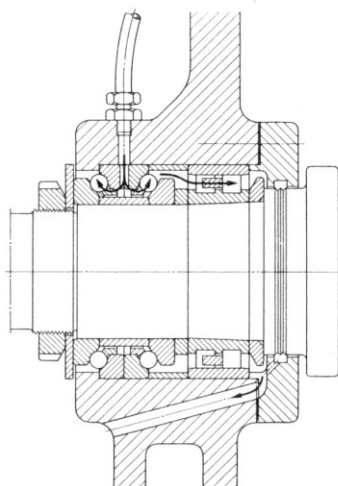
Circulating oil system for a spindle bearing arrangement incorporating one angular contact ball bearing and one double row cylindrical roller bearing
